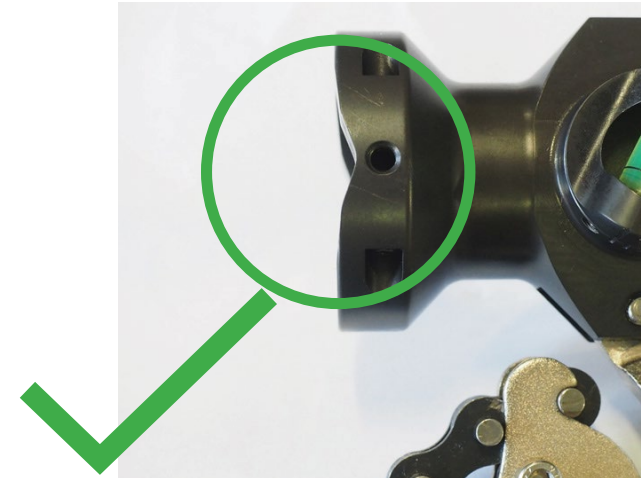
If cutters are pre-installed, use your drill to ensure that both the hex drive and cutter end of the cutter assembly are fully retracted.
